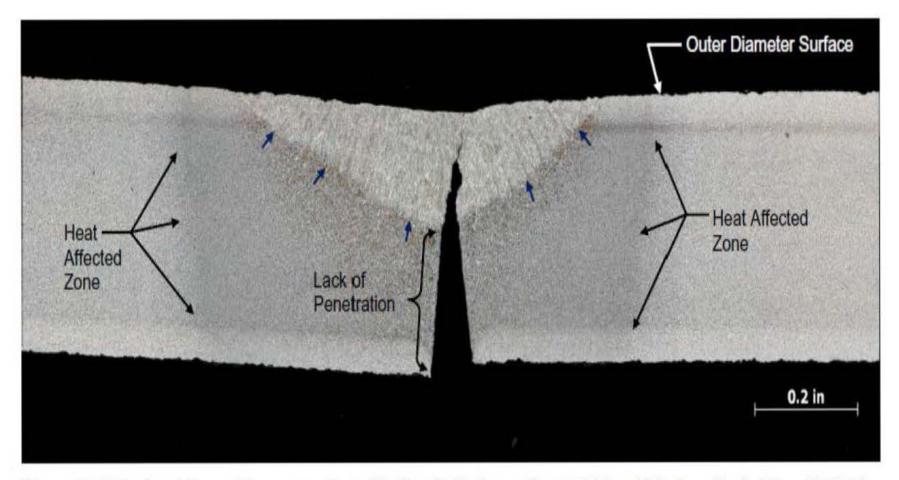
Etched metallographic cross section of the longitudinal seam in pup 3 taken 10 inch north of girth weld C3. The microstructure of the weld was consistent with a fusion welding process along the outer diameter surface of the seam. Blue arrows – weld pool boundary along outer diameter surface seam.
